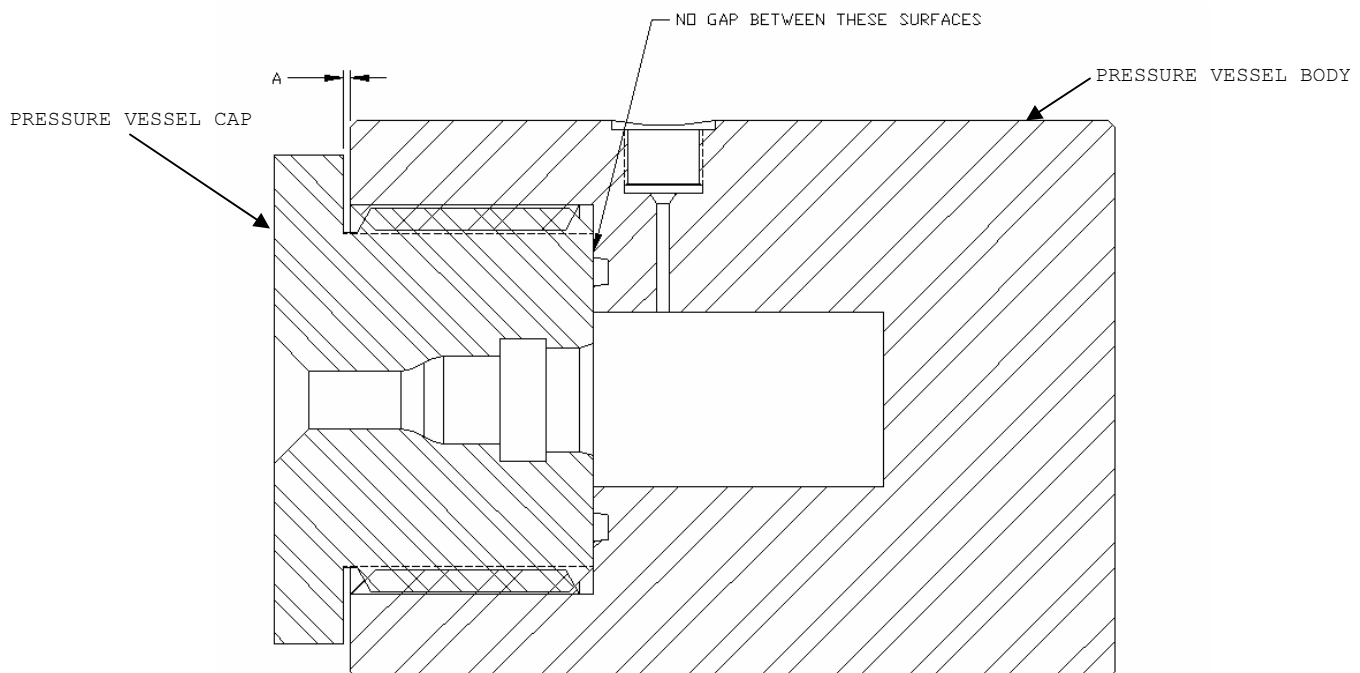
VESSEL CAP INSTALLED INTO VESSEL BODY
